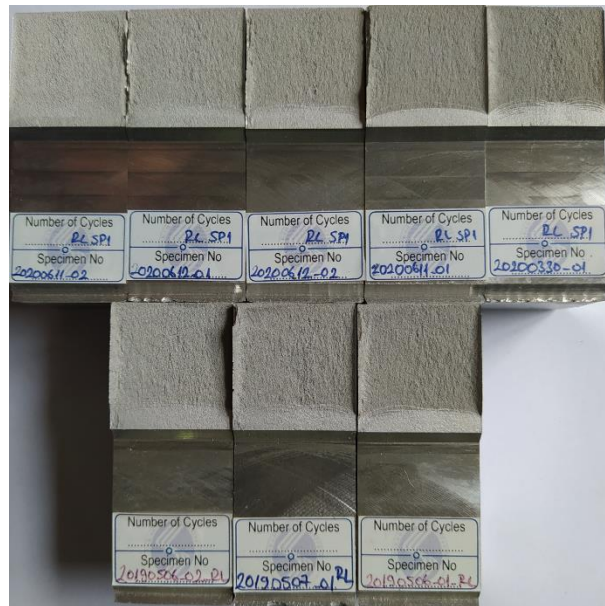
Fracture surfaces of the specimen tested under Spectrum-1-c
